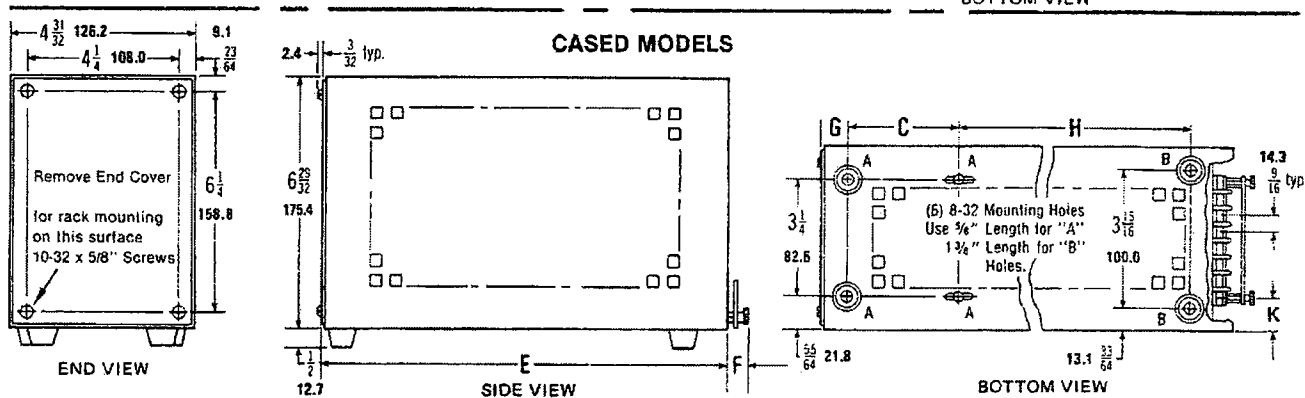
MECHANICAL OUTLINE DRAWING, PRM 280 SERIES.
